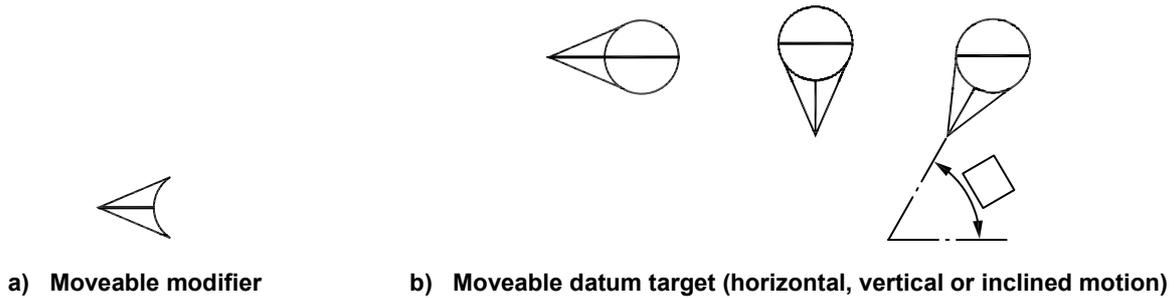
Moveable modifier and examples of datum target frame with the moveable modifier
